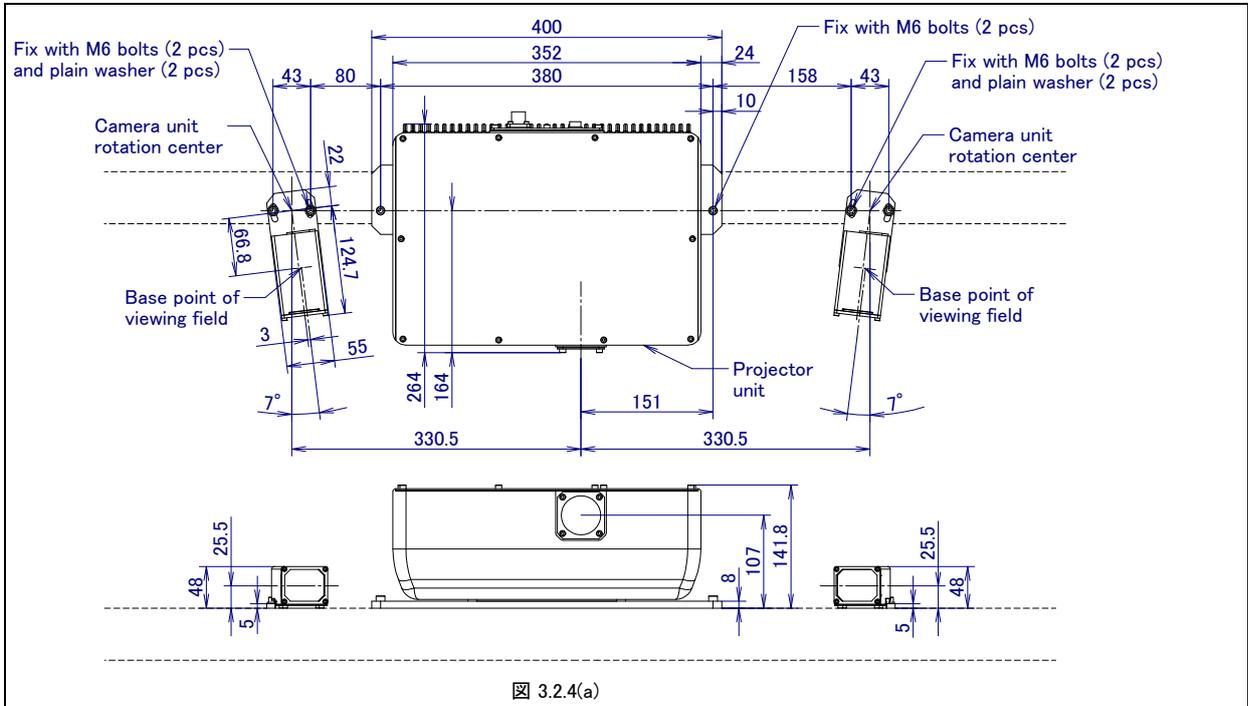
(a) External dimension of 3D Area Sensor
